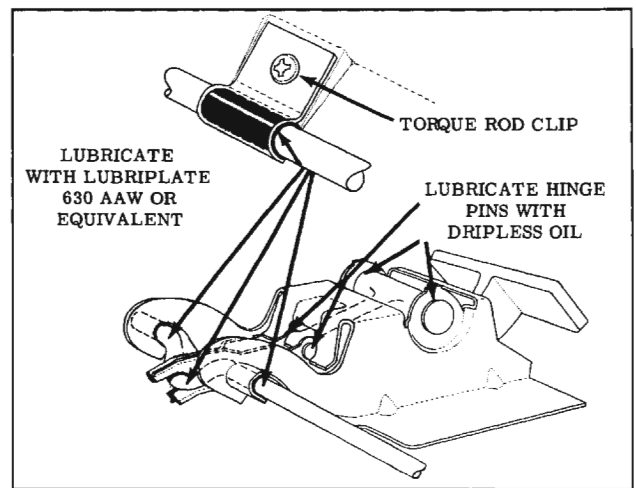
Back Door Hinge and Torque Rod Lubrication
